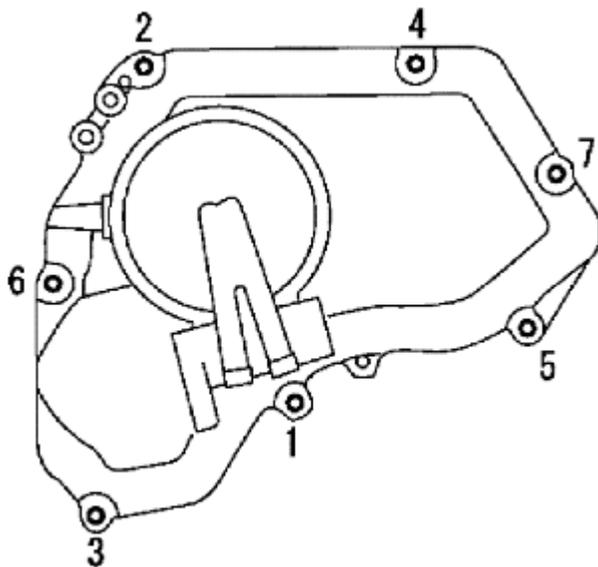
Tightening Order Of Intake Valve Timing Control Cover
